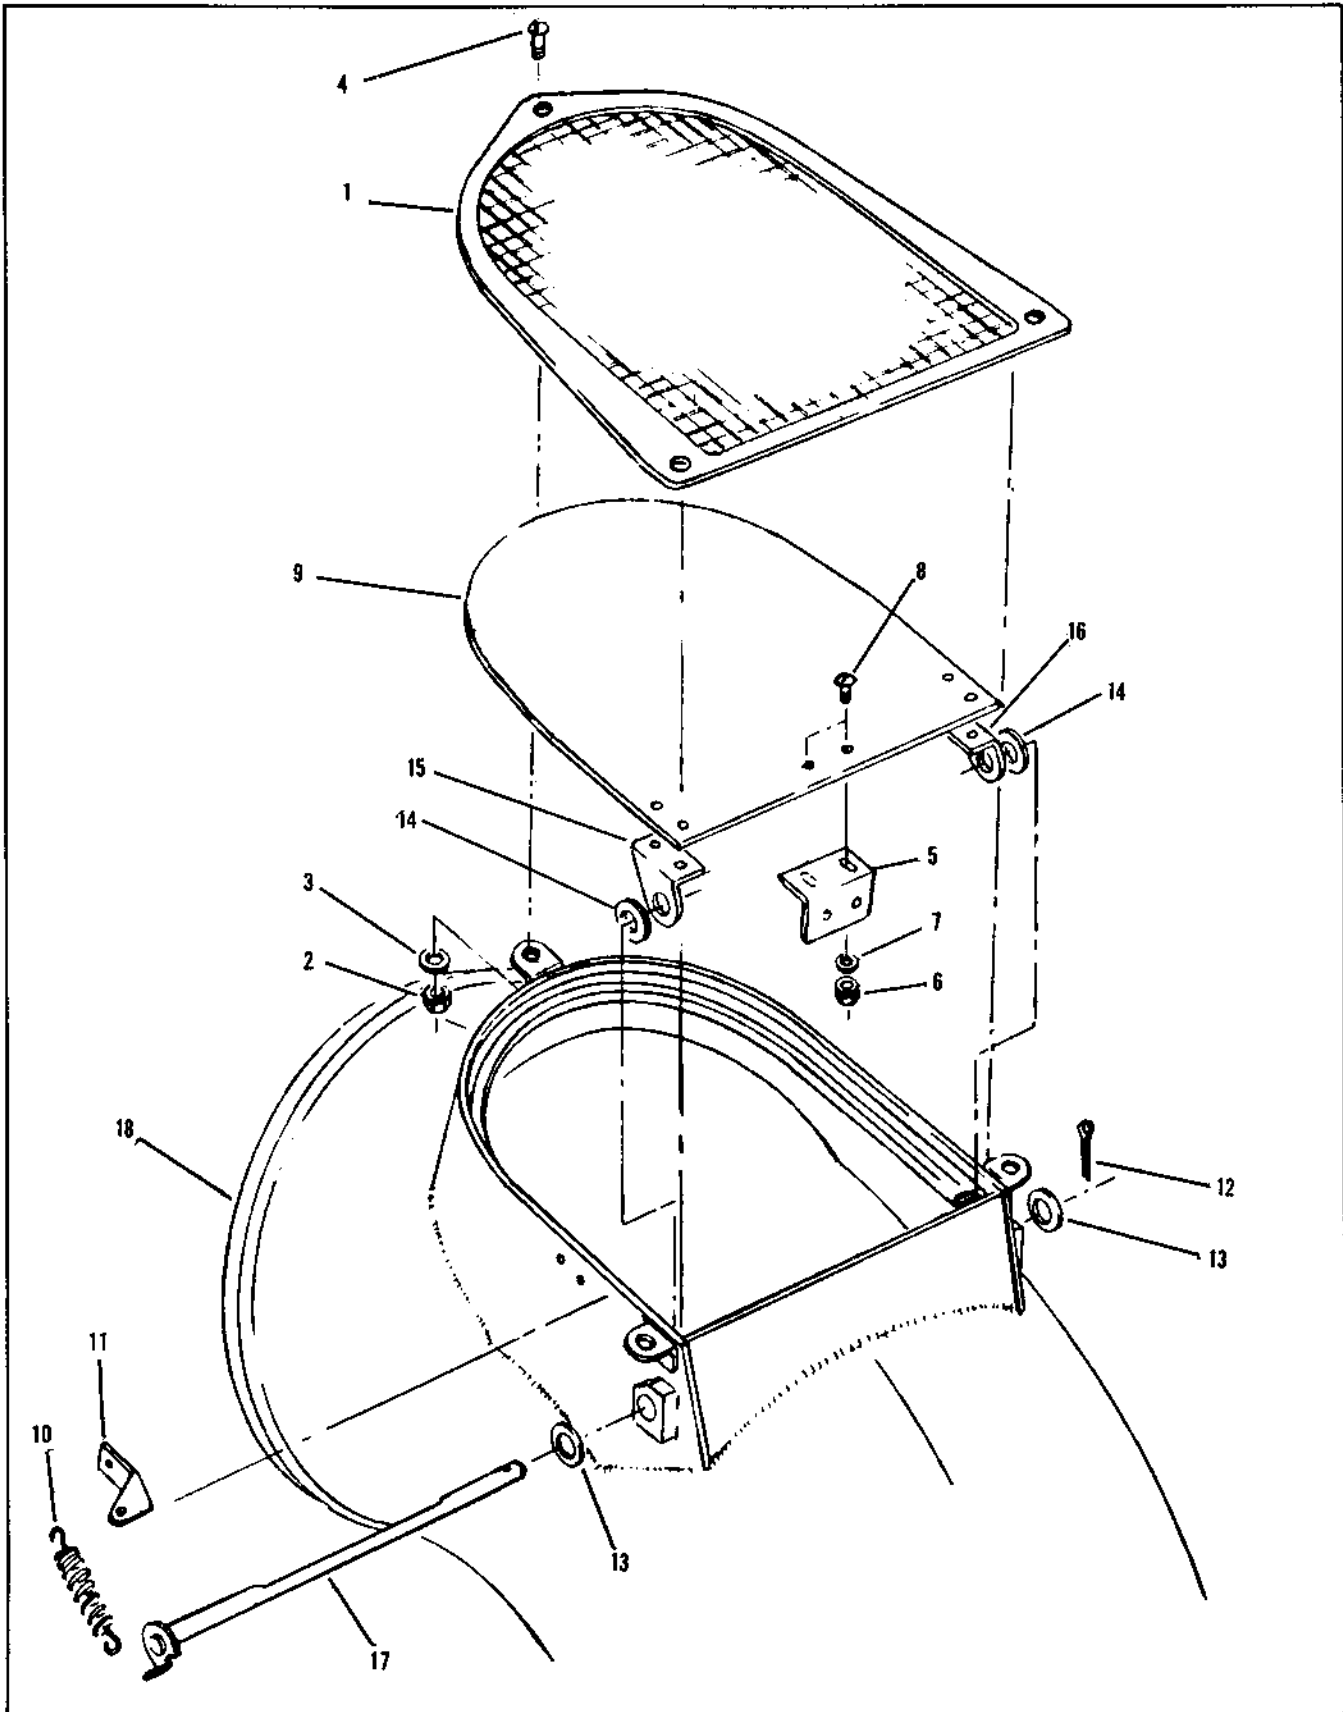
Valve Assembly Compressor Inlet Air Diverter
